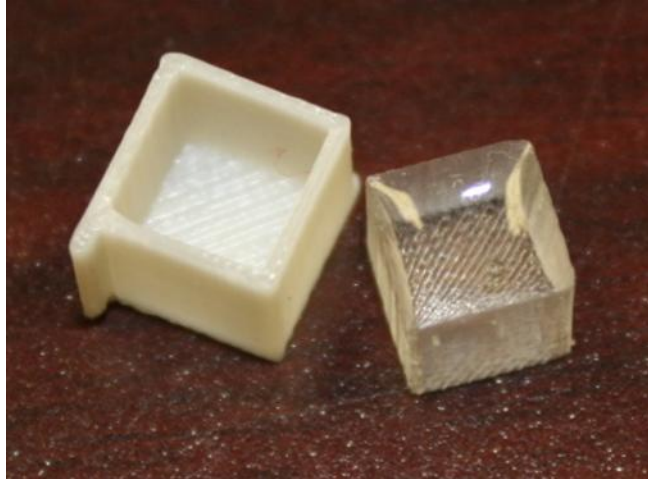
Final 3D printed PDMS mold and sample produced. Notice the texture on the sample.
